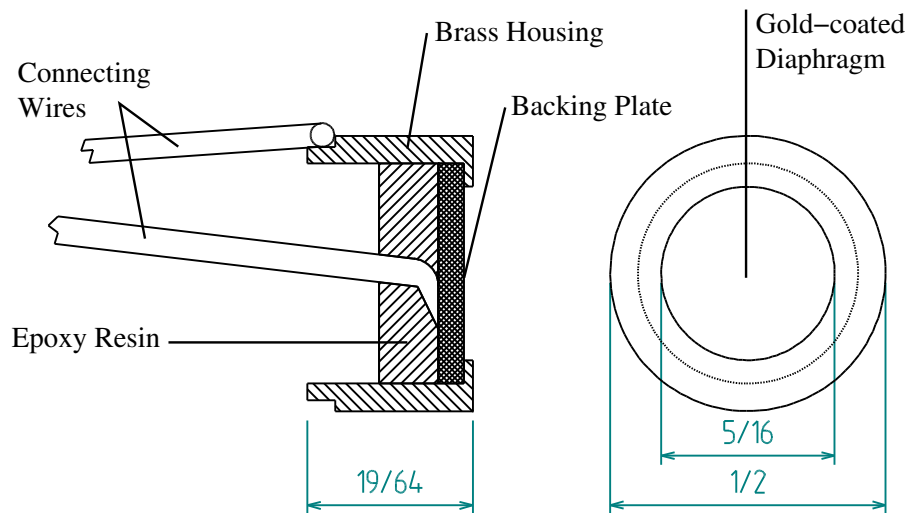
The Kay transducer insert used by the sonar system described in this thesis. Dimensions in Inches.
